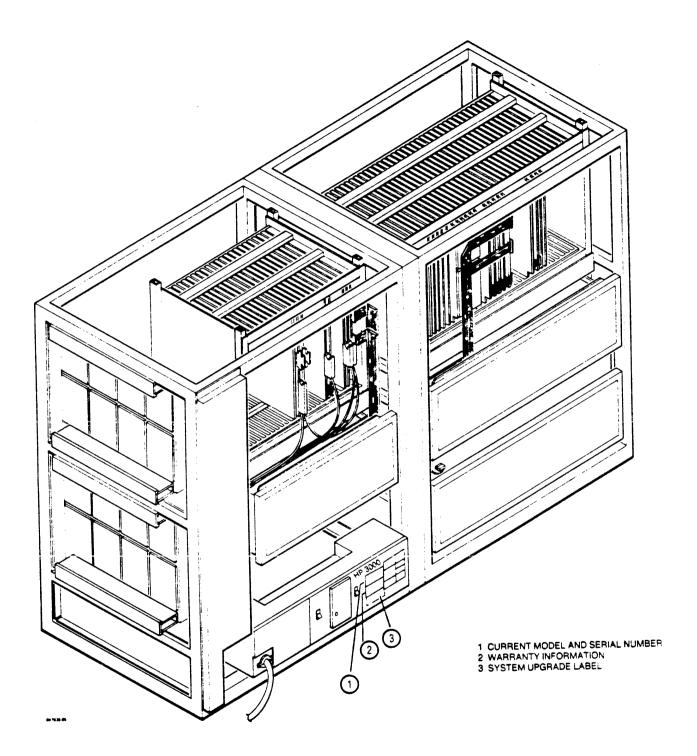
SPU Rear View (HP 32460A/68A), Panels Removed.
